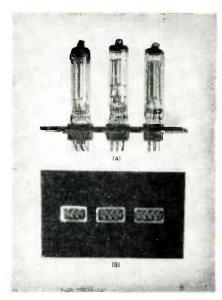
Tube socket is held in chassis hole by retaining clip, thus eliminating space otherwise required for bolts
